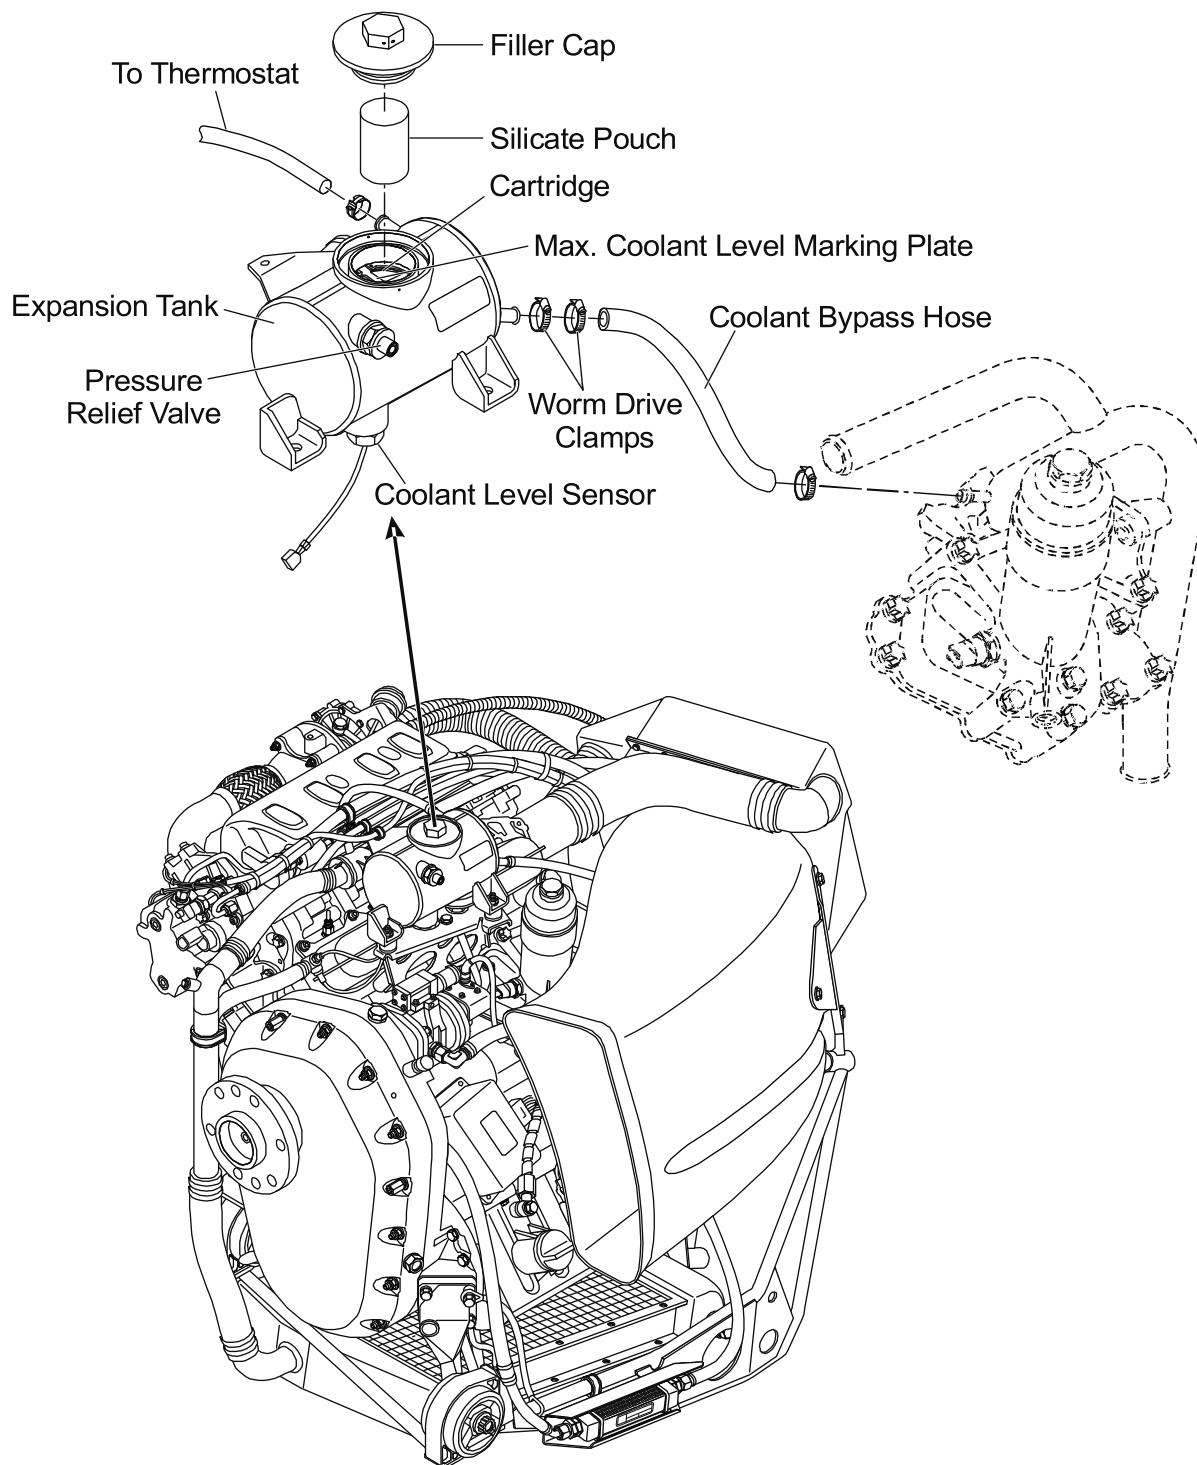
Engine Coolant Expansion Tank / Filler Cap
